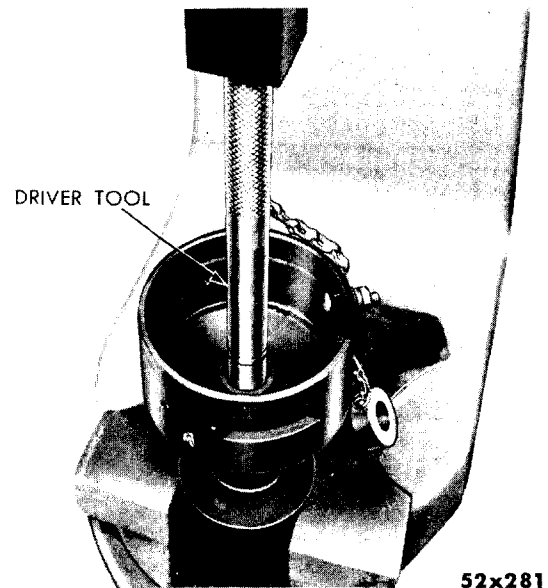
Removing Drive Shaft Bushings (8 Cylinder) Typical
